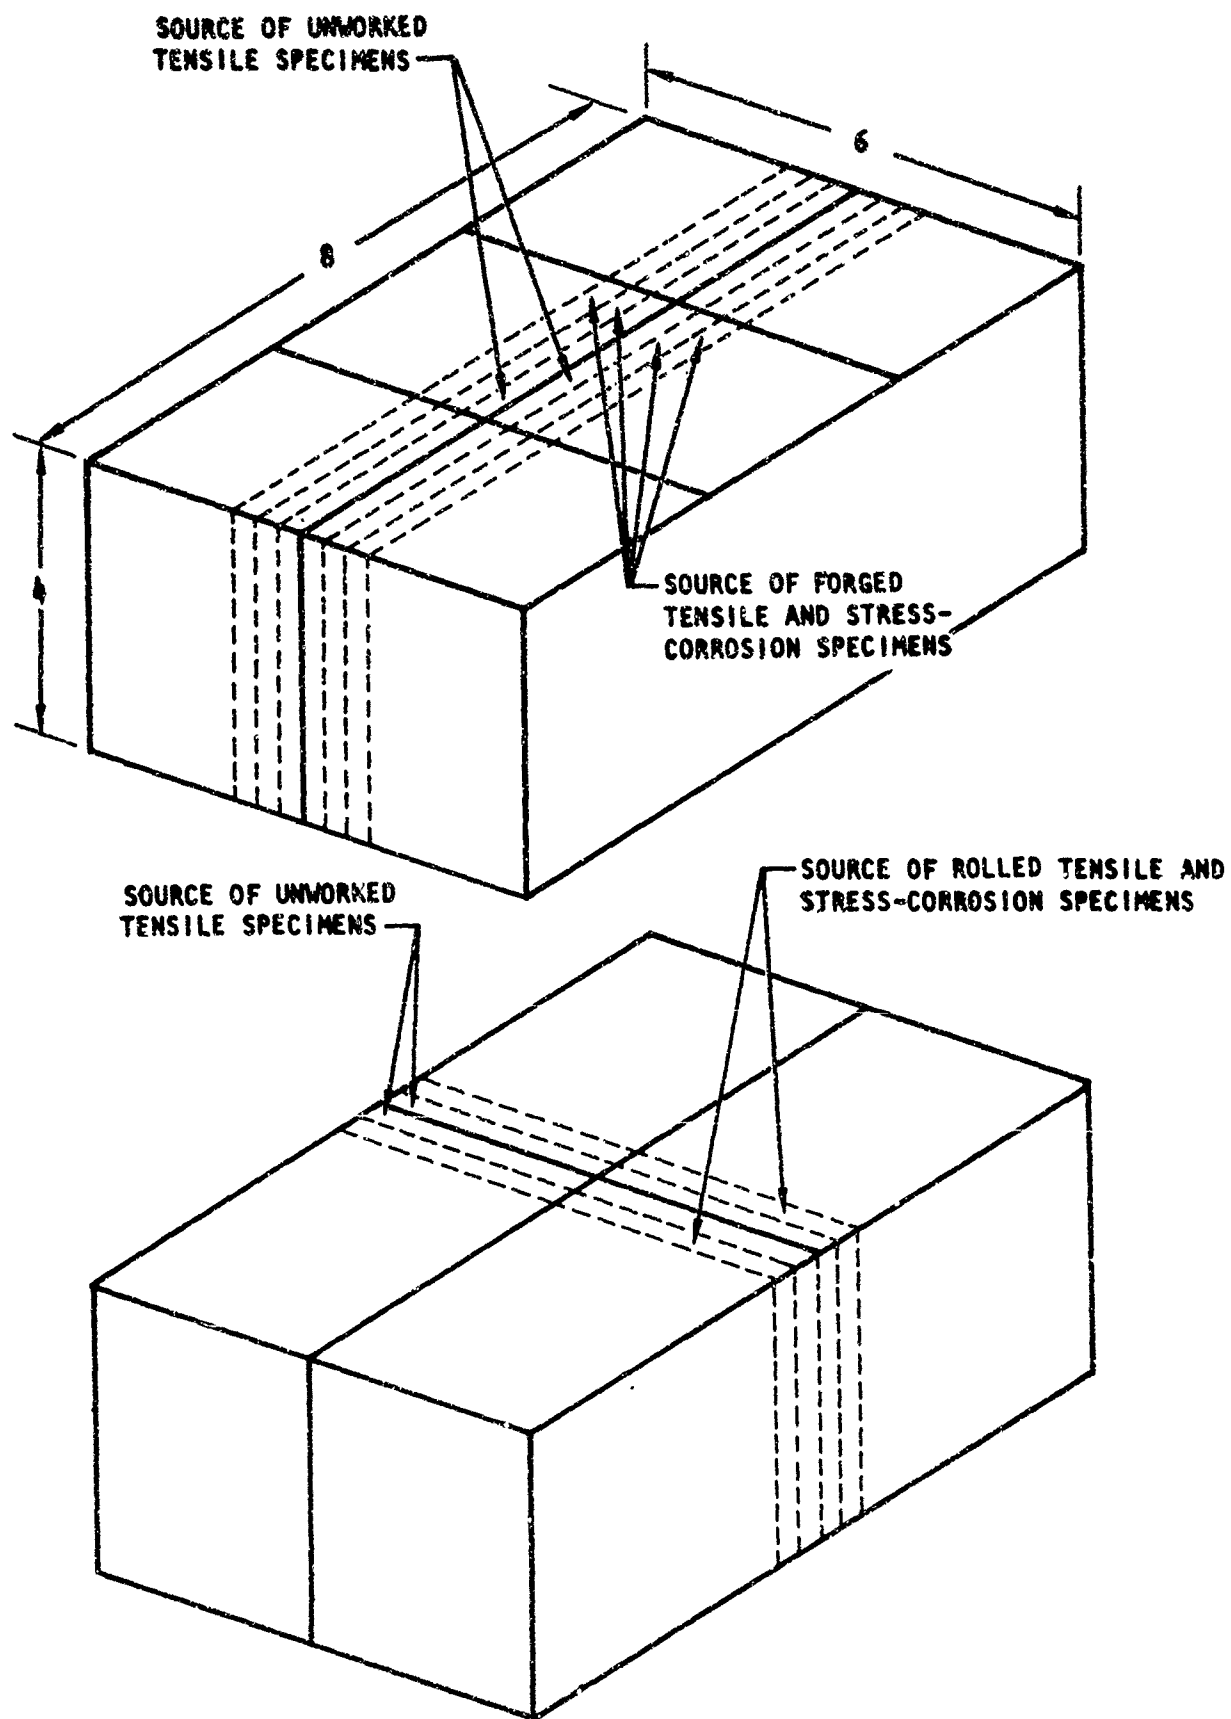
Sectioning of As-Received 7075-T73 Hand Forgings for Heat Treatment and Forging (Billets AF, BF, CF, DF) or Rolling (Billets AR, BR, CR).
